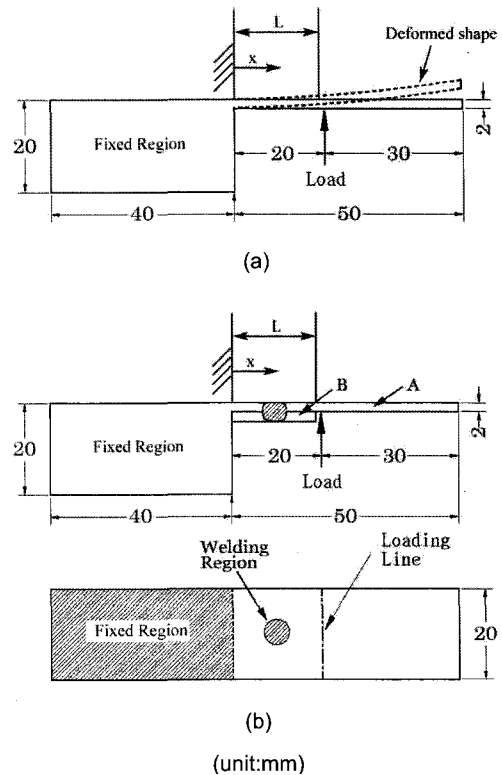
Dimensions of the specimen used for measurement of out-of-plane displacement. (a) normal cantilever without spot weld (before weld), (b) spot welded cantilever (after weld)
